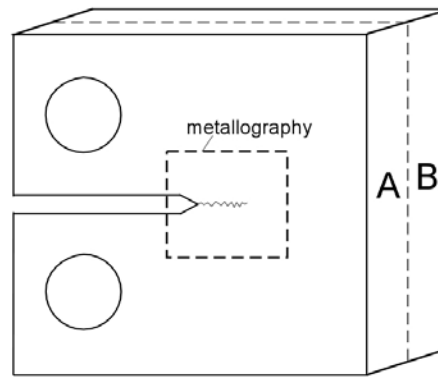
Sectioning of specimens for metallographic examination (Section A) and measurement of crack size on crack opened specimen half (Section B).
